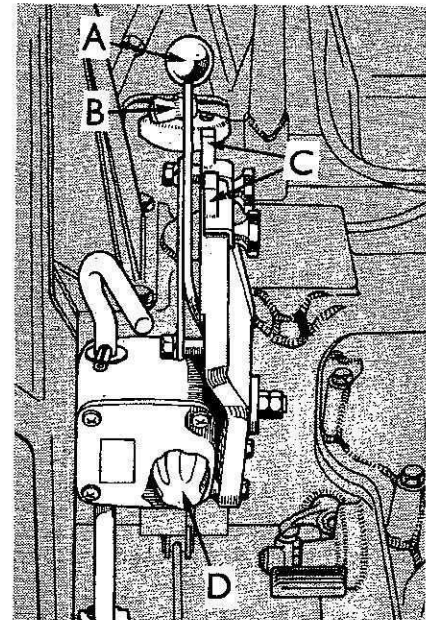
Drawing showing hydraulic system controls. Refer also to Fig. 169 and 170.
